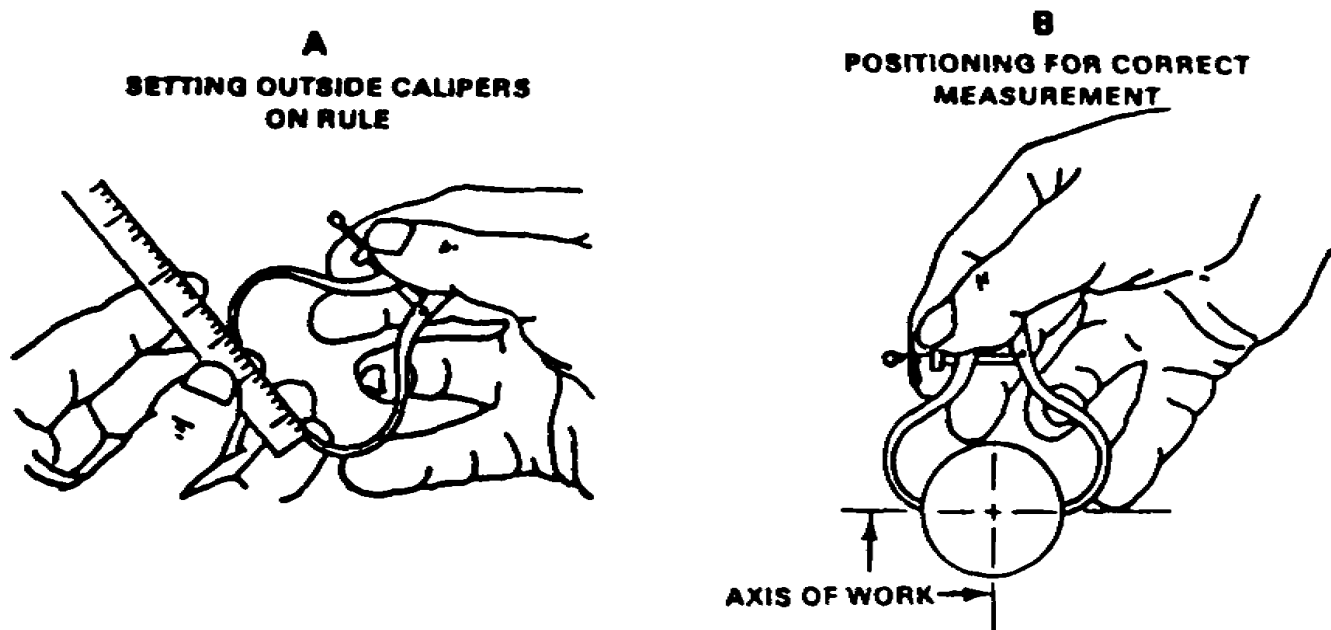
USING OUTSIDE CALIPERS (A AND B)
